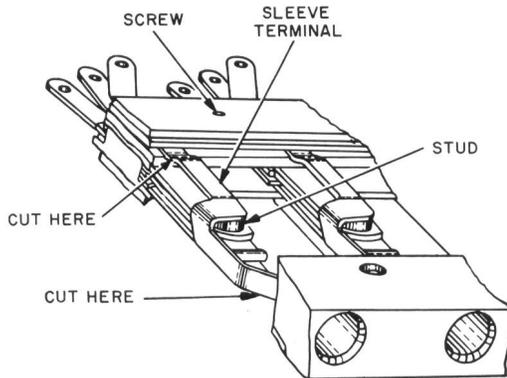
Points at Which to Cut Sleeve Terminals in 92- and 292-Type Jacks
